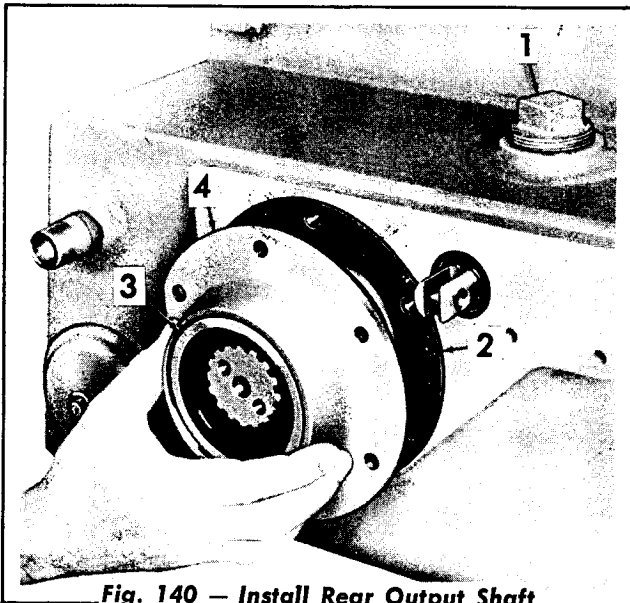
Install Rear Output Shaft Bearing Retainer
